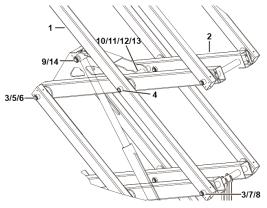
Assembling the third fork and lower cylinder $\,$
